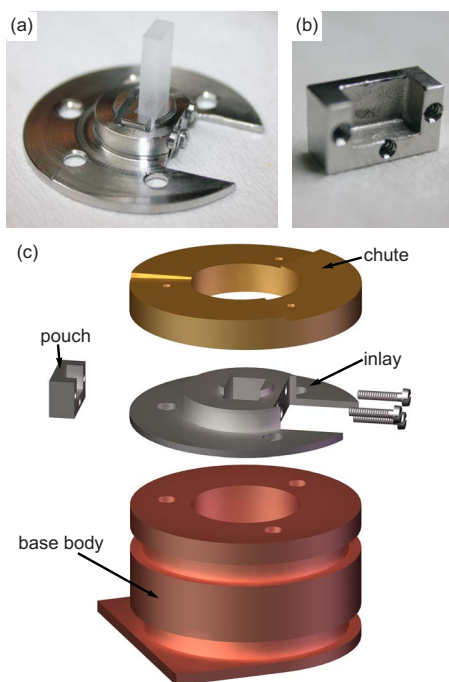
(Color online) Sample holder for system 1. (a) Inlay plate with incorporated clamping mechanism. (b) Steel pouch for sample crystals. The three screws facilitate precise force adjustment. (c) The inlay with the clamping mechanism is assembled between the copper base body of the sample holder and the chute for the approach of the beetle type scan head.
